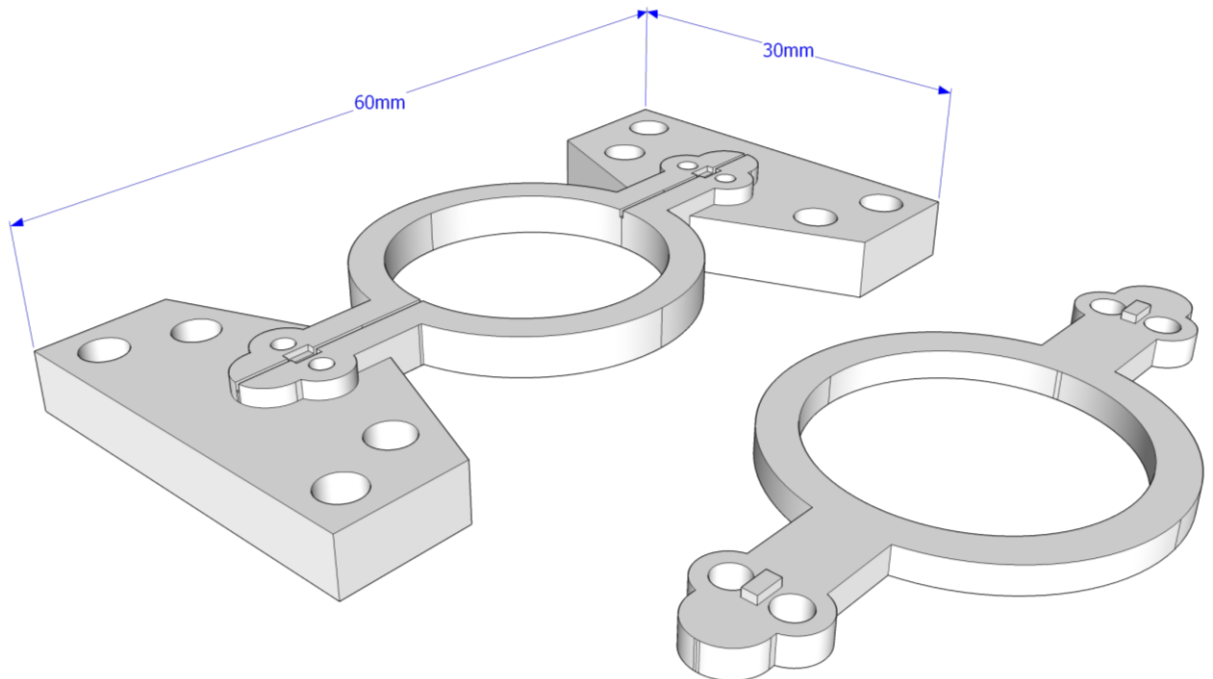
Example of a large fibre holder used in photoacoustic experiment (left) with a complementary lid (right). The screw openings were used for mounting the lid to the holder and the holder to its base.
